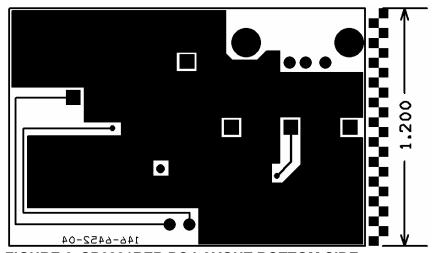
SP6231REB PC LAYOUT BOTTOM SIDE
